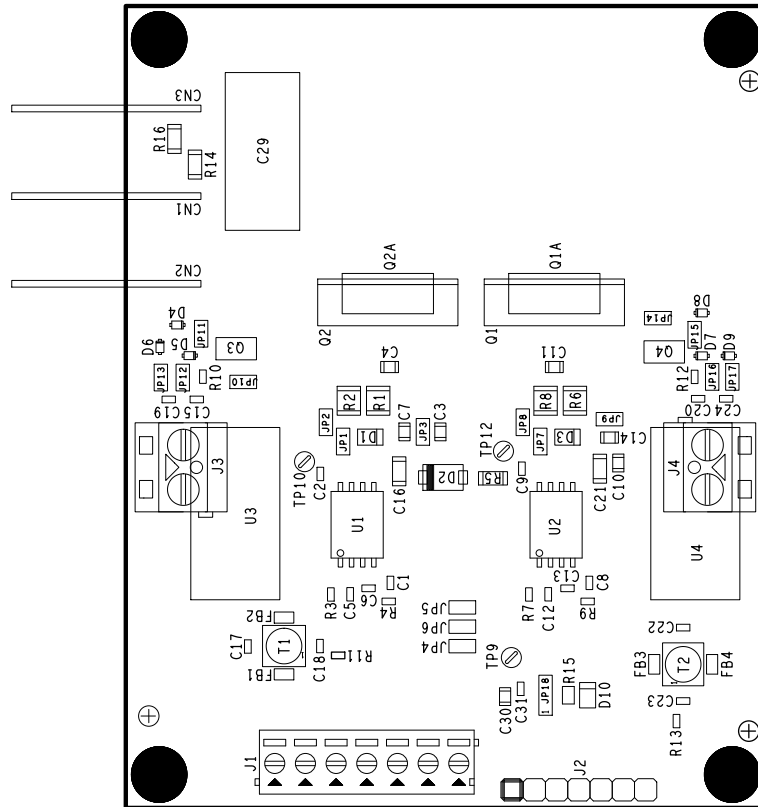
EVALSTGAP2SiCS – Layout (component placement bottom view)
